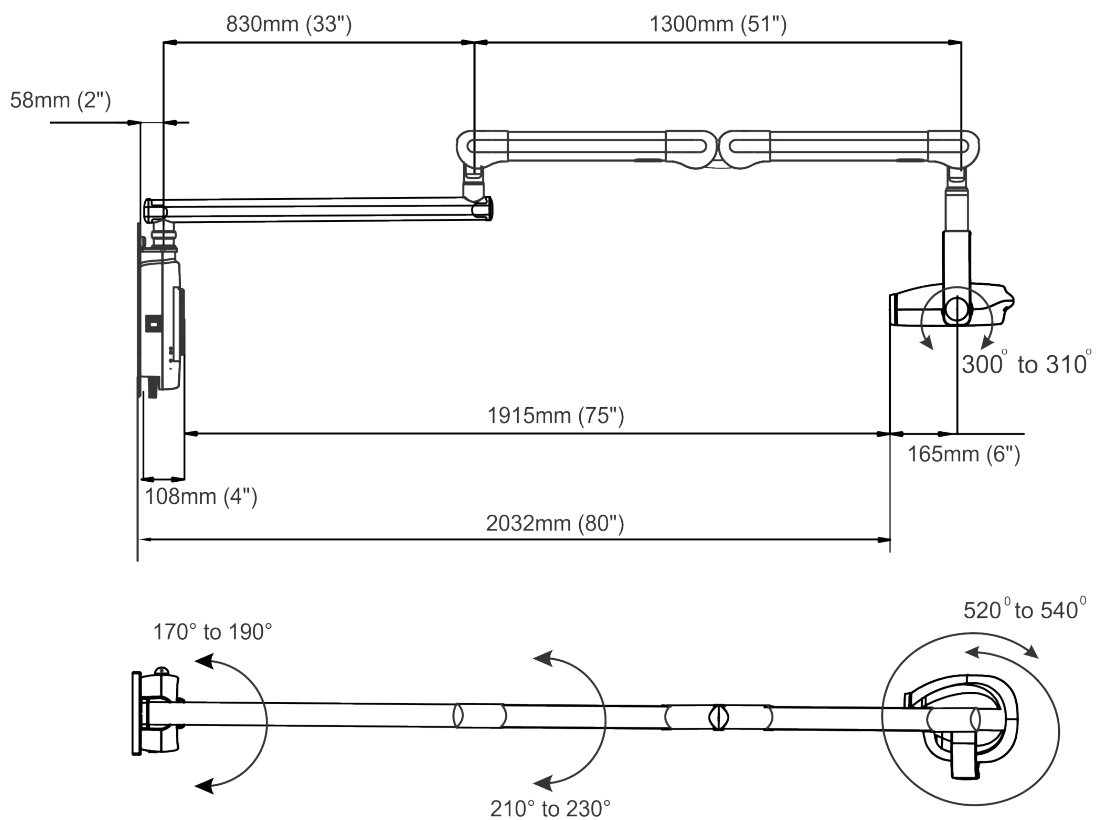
Right Side and Top views (Wall mount 24"/33" Support Tube)
